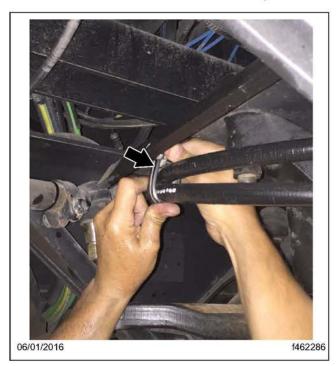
, Mounting the Hydraulic Hoses to the Frame
